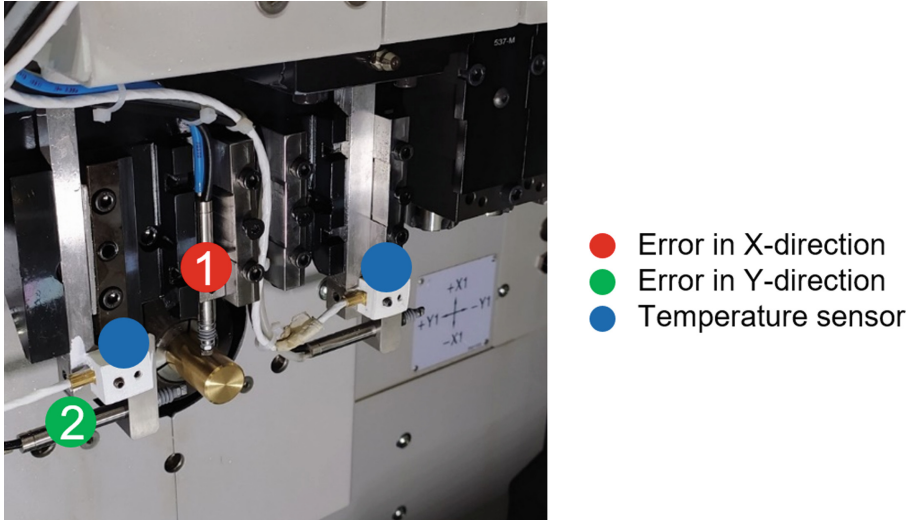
Working space of the Swiss-type lathe. The tool holder can be equipped with turning, drilling, and boring tools. Displacement probes and temperature sensors mounted on the tool holder are shown.
